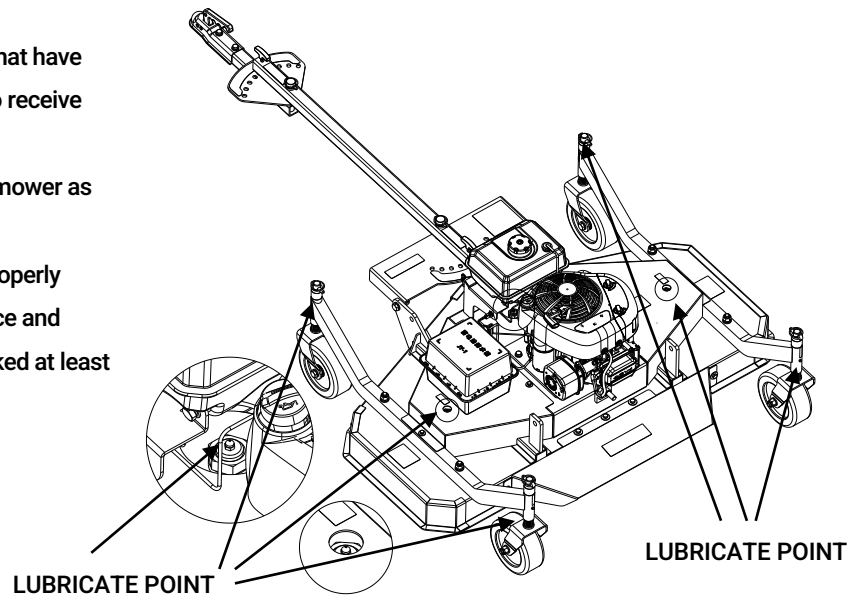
Cutter Head And Wheel Frame Mount Assy. Lubrication Location
